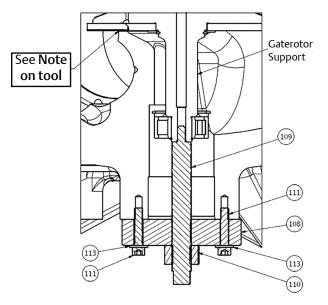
Tool To Install and Remove Bearing Housing Assembly
